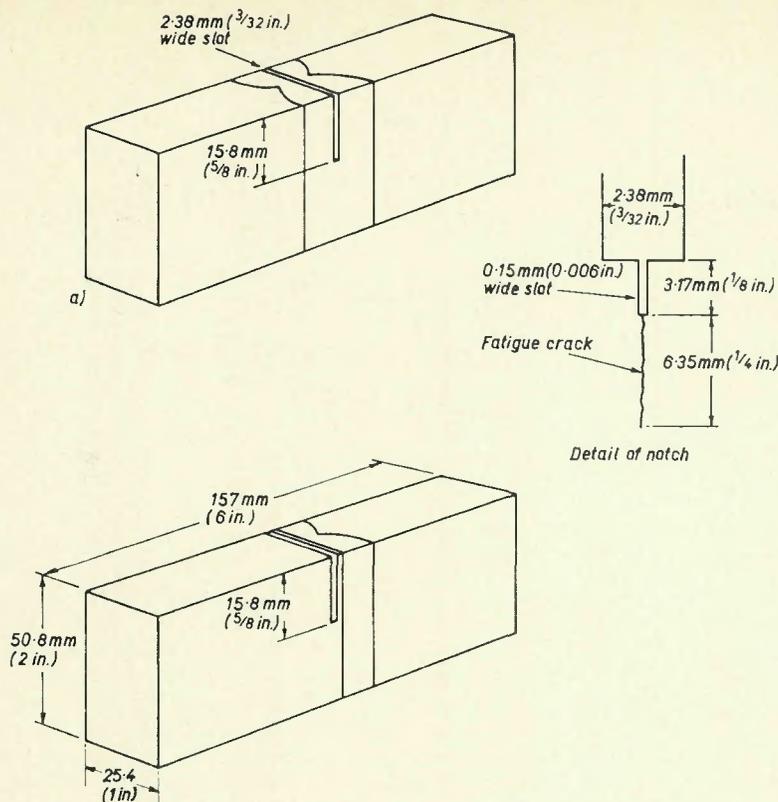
Details of notch bend test specimens for measurement of crack opening displacement in (a) weld metal, (b) heat-affected zone
